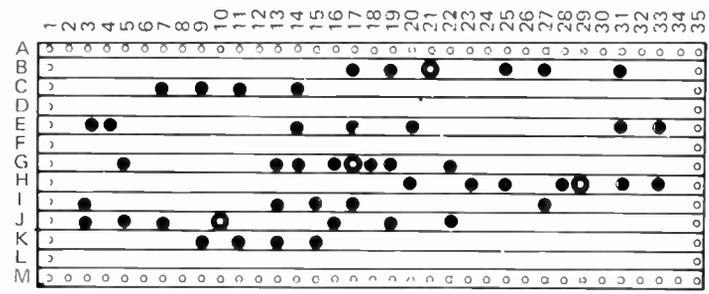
The pads with holes through them indicate where the Veroboard track must be cut with a small drill as detailed in the text. The solid dots indicate where components are soldered to the tracks.
